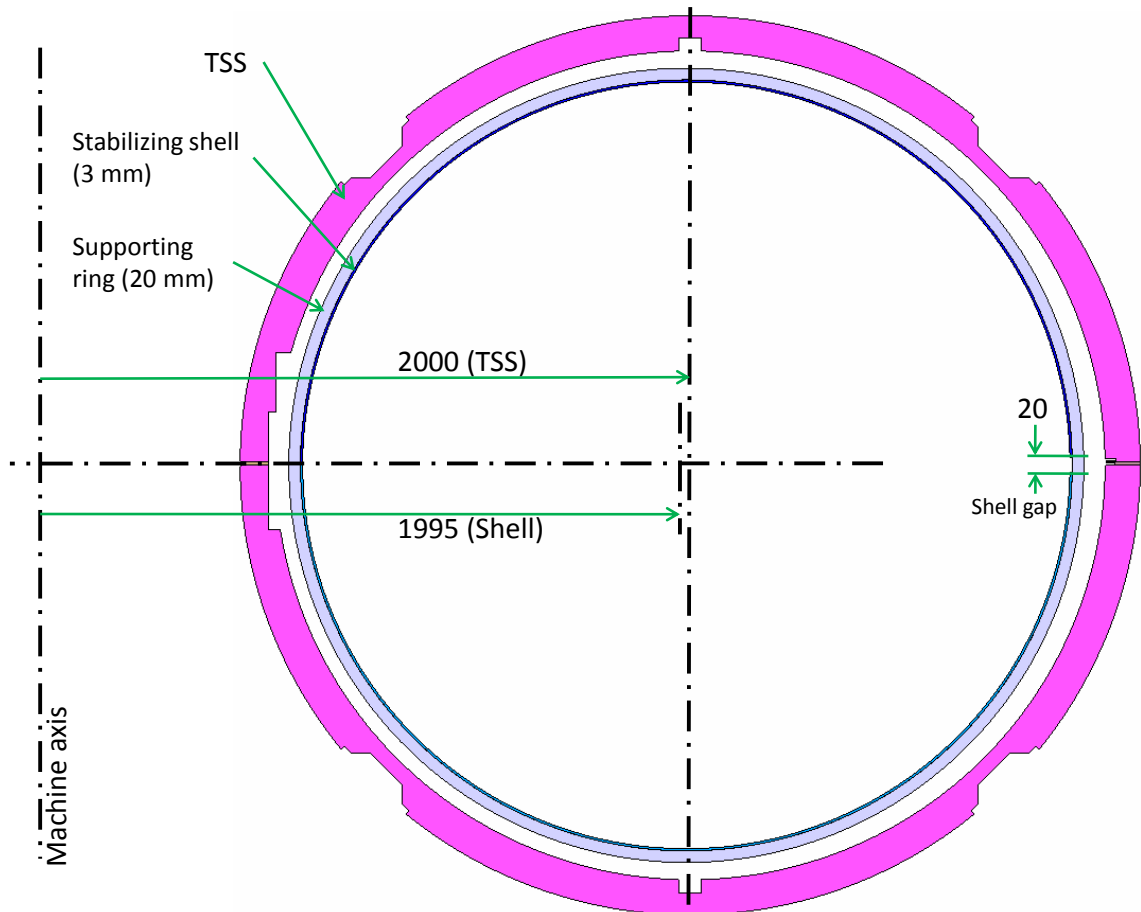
Sectional view of TSS, stabilizing shell and supporting ring
